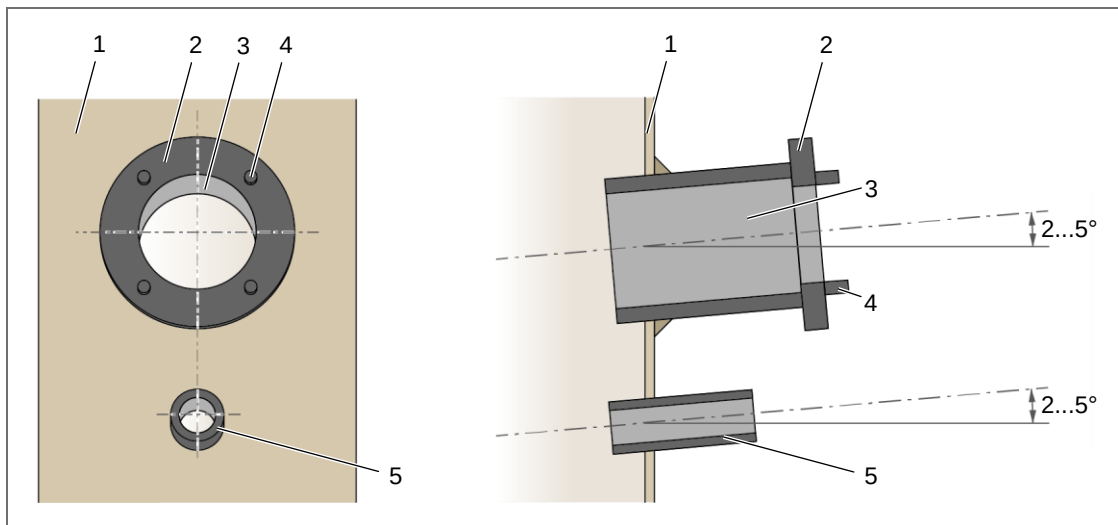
Mounting of welding flange – variant with separate return
